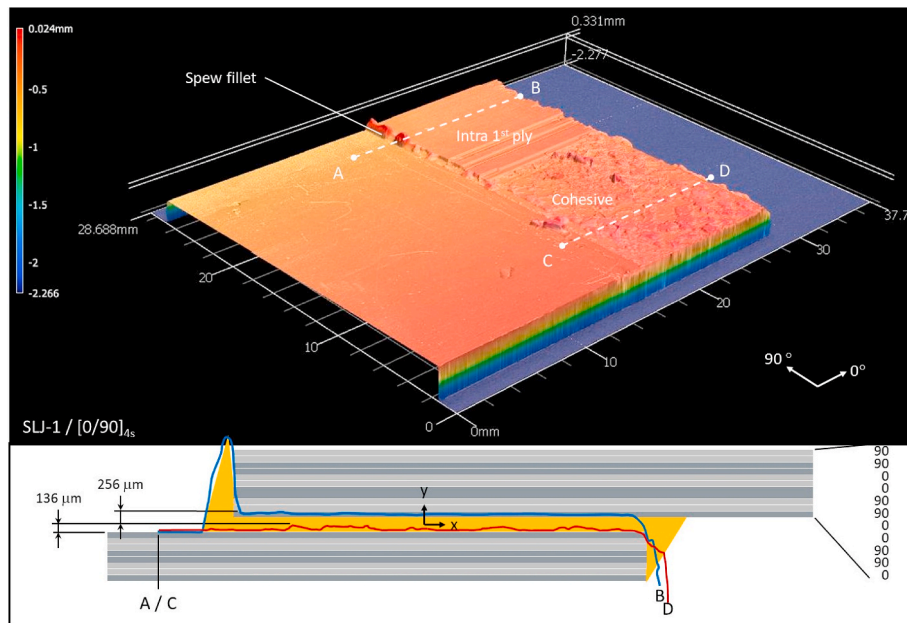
Final fracture surface of a typical SLJ-1 topology in layout $[0/90]_{4s}$.
